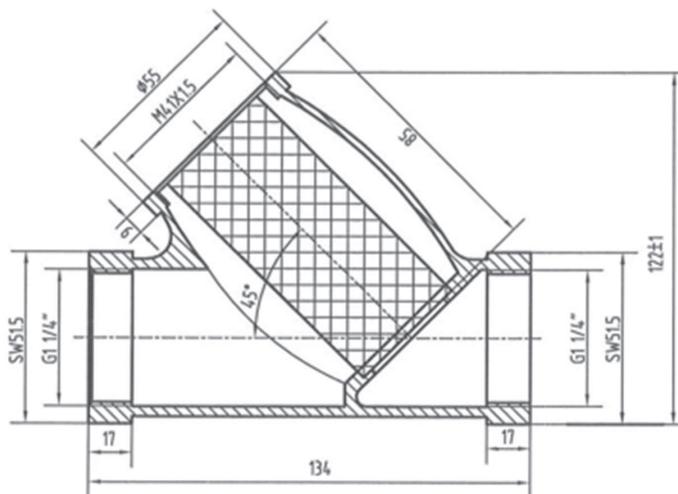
AUTO-SUPPLY VALVE DIMENSION
